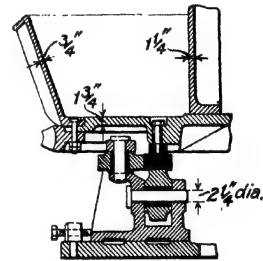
DETAIL OF DOUBLE ROLLER BEARING.
